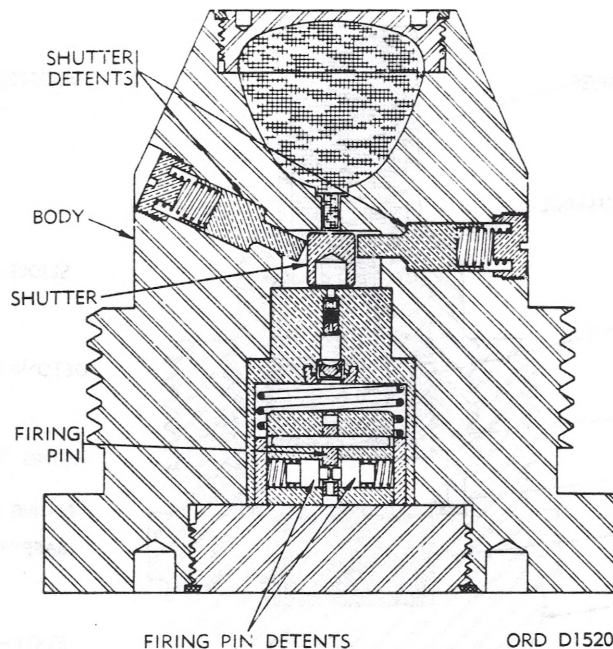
Fuze M58, Cutaway View Showing Unarmed Condition
